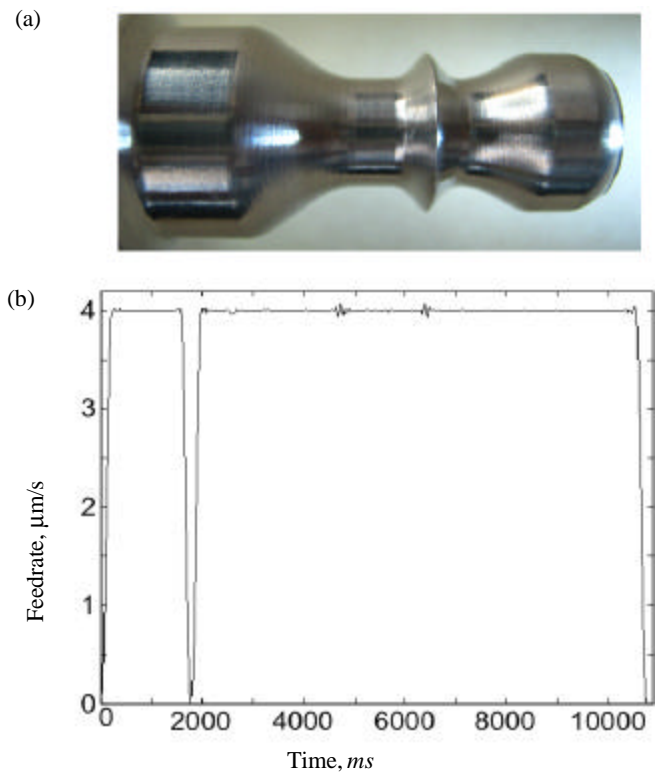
Experimental results on constant feedrate: a) Machined piece; and b) Measured feedrate
